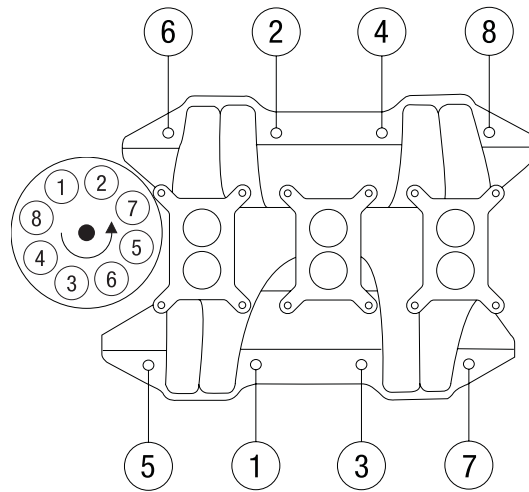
361-440 c.i.d. Chrysler Intake Manifold Torque Sequence
